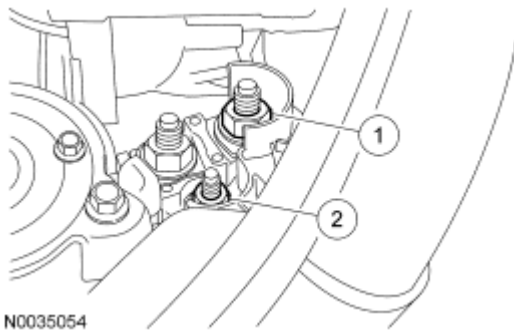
Identifying Battery Cable & Starter Solenoid Terminal Nut
